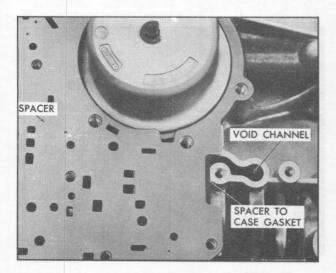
Valve Body Spacer-to-Case Gasket
